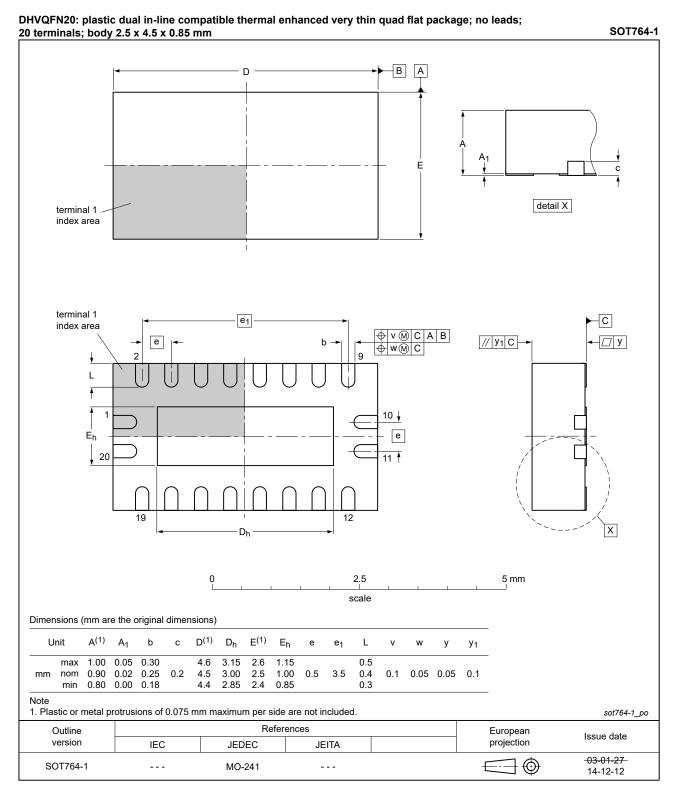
Package outline SOT764-1 (DHVQFN20)
